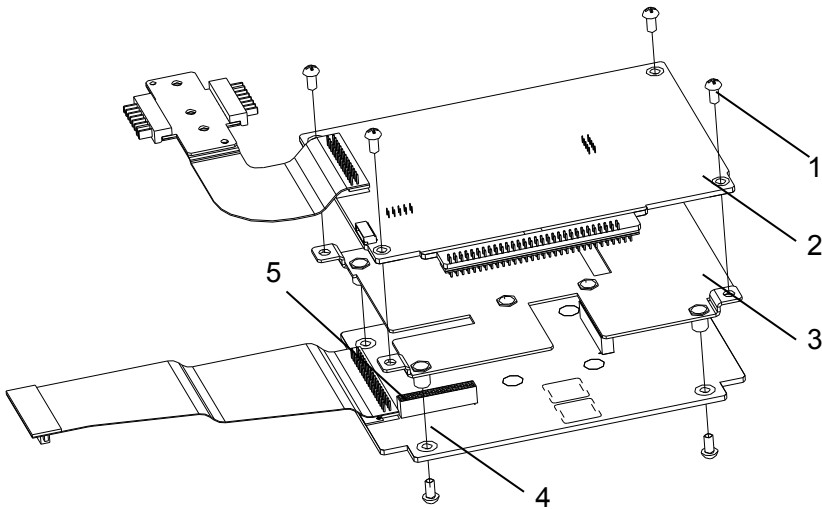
Disassembling Main Power Board, Separating Board and Auxiliary Board
